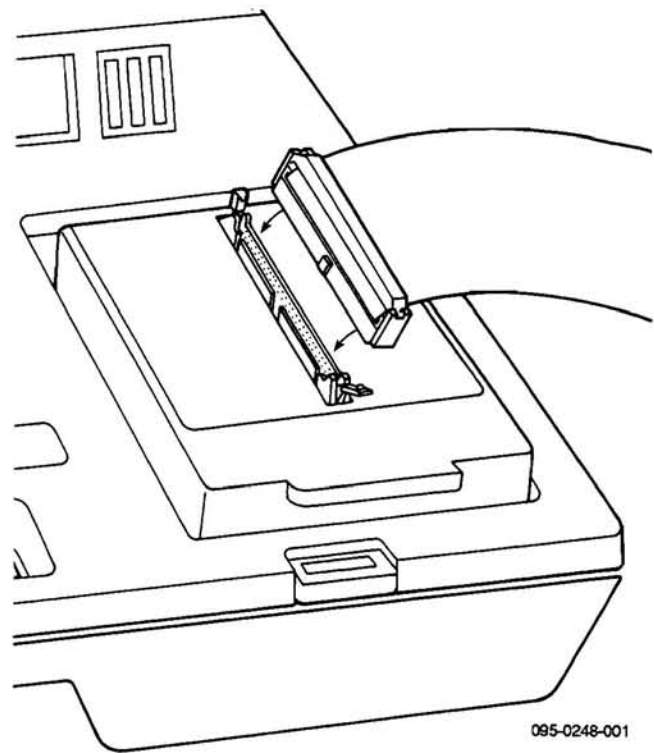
Connecting the Ribbon Cable to the Adapter Module
